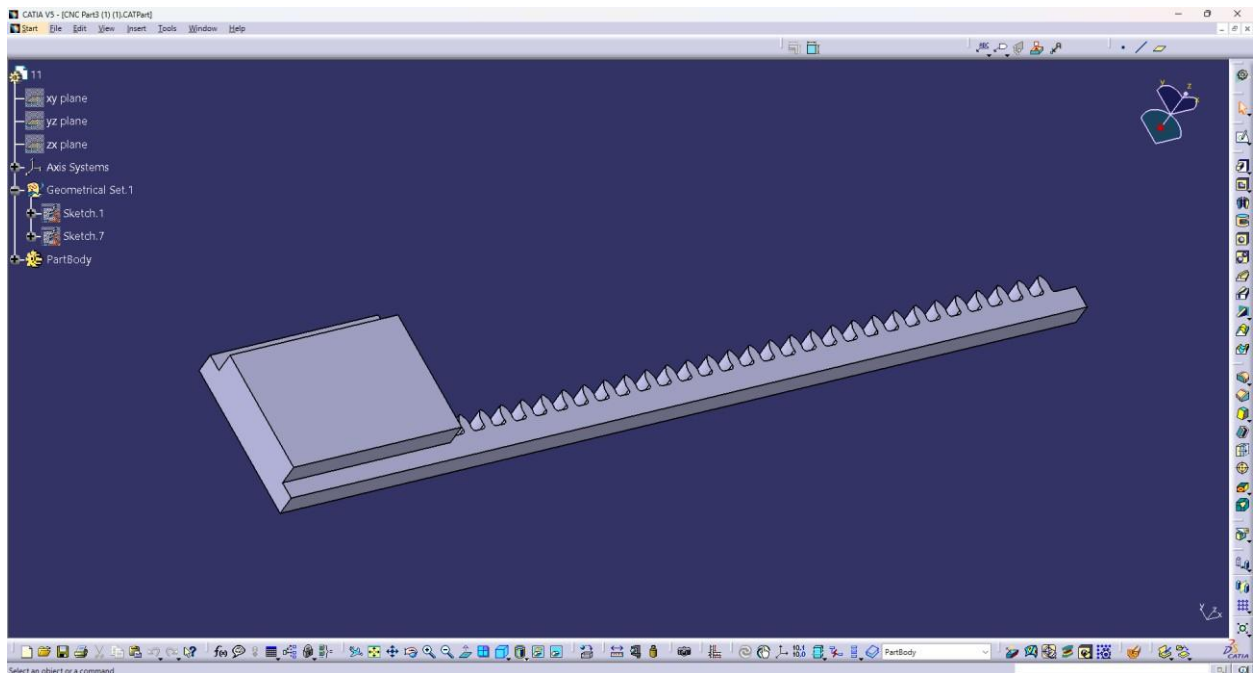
3D Printed CNC Plotting Machine- Parts
